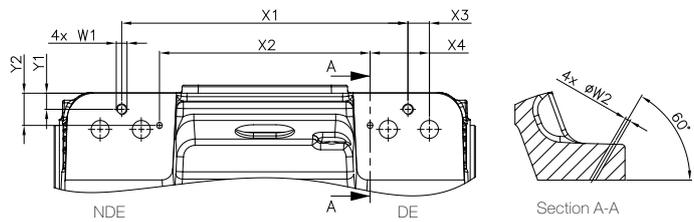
Dimensions for motors with dowel pins and leveling screws
